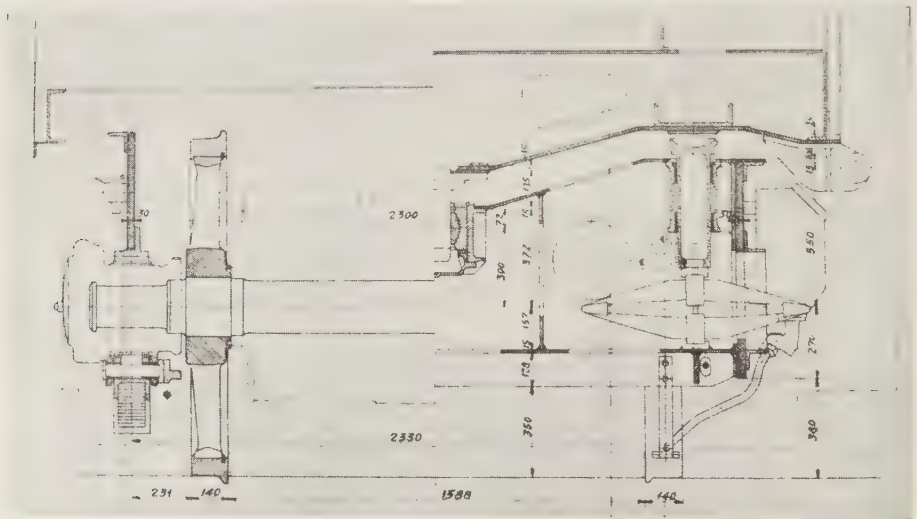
Locomotive series 7400. — Pivot and spring side bearings.
